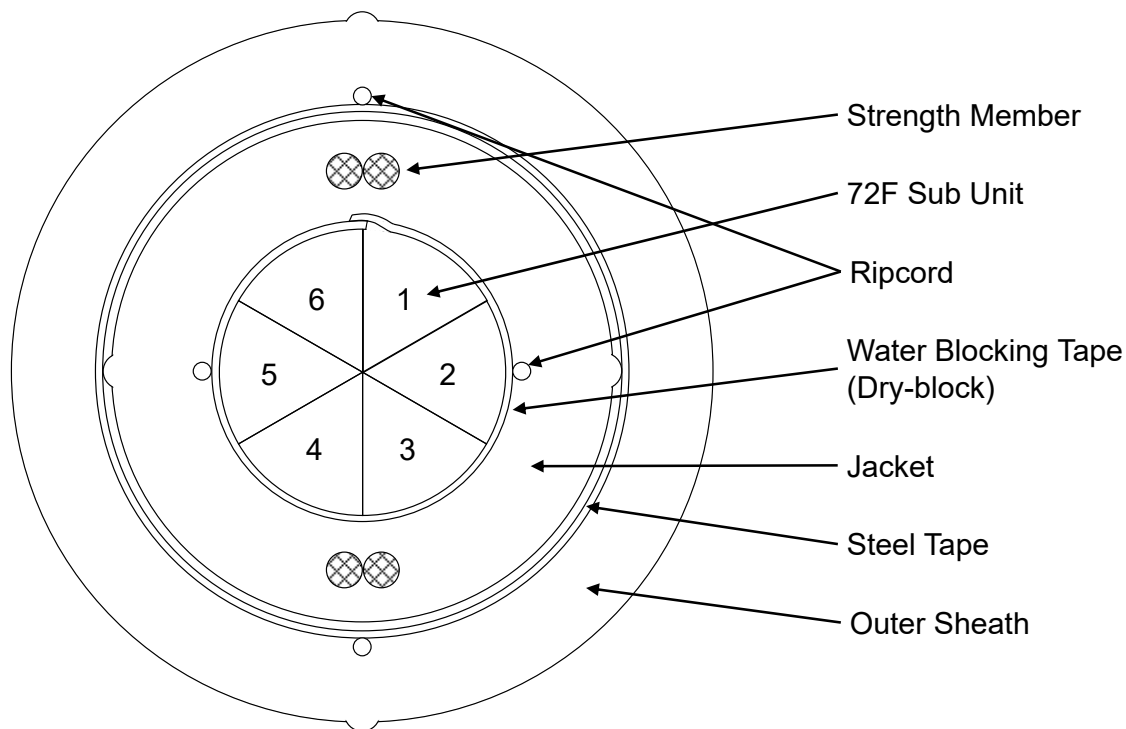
Cross Section of 432F e-Ribbon® Single-armed Cable
